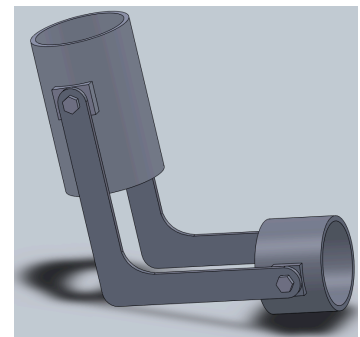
A SolidWorks schematic of the boomerang design element showing the basic premise for attachment of the rigid boomerang piece to each cuff. This rigid piece would support the lower arm at the desired carrying angle and reduce unwanted movement of the lower arm while allowing hand mobility.
